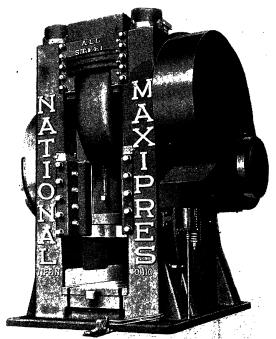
Coining press. Such a press has a definite stroke and can work to close tolerances. (National Machinery Co.)
